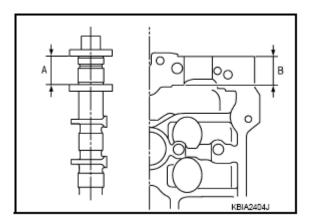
Identifying Camshaft No. 1 Journal And Cylinder Head No. 1 Journal Bearing <u>Dimensions</u>
